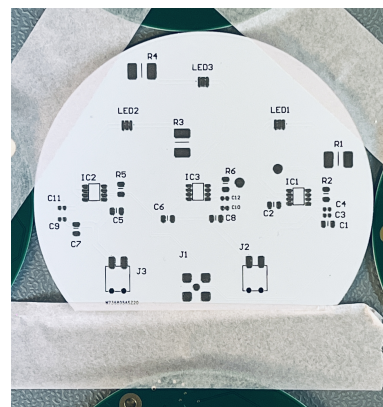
UWOCS Emitter board with solder paste applied on it
